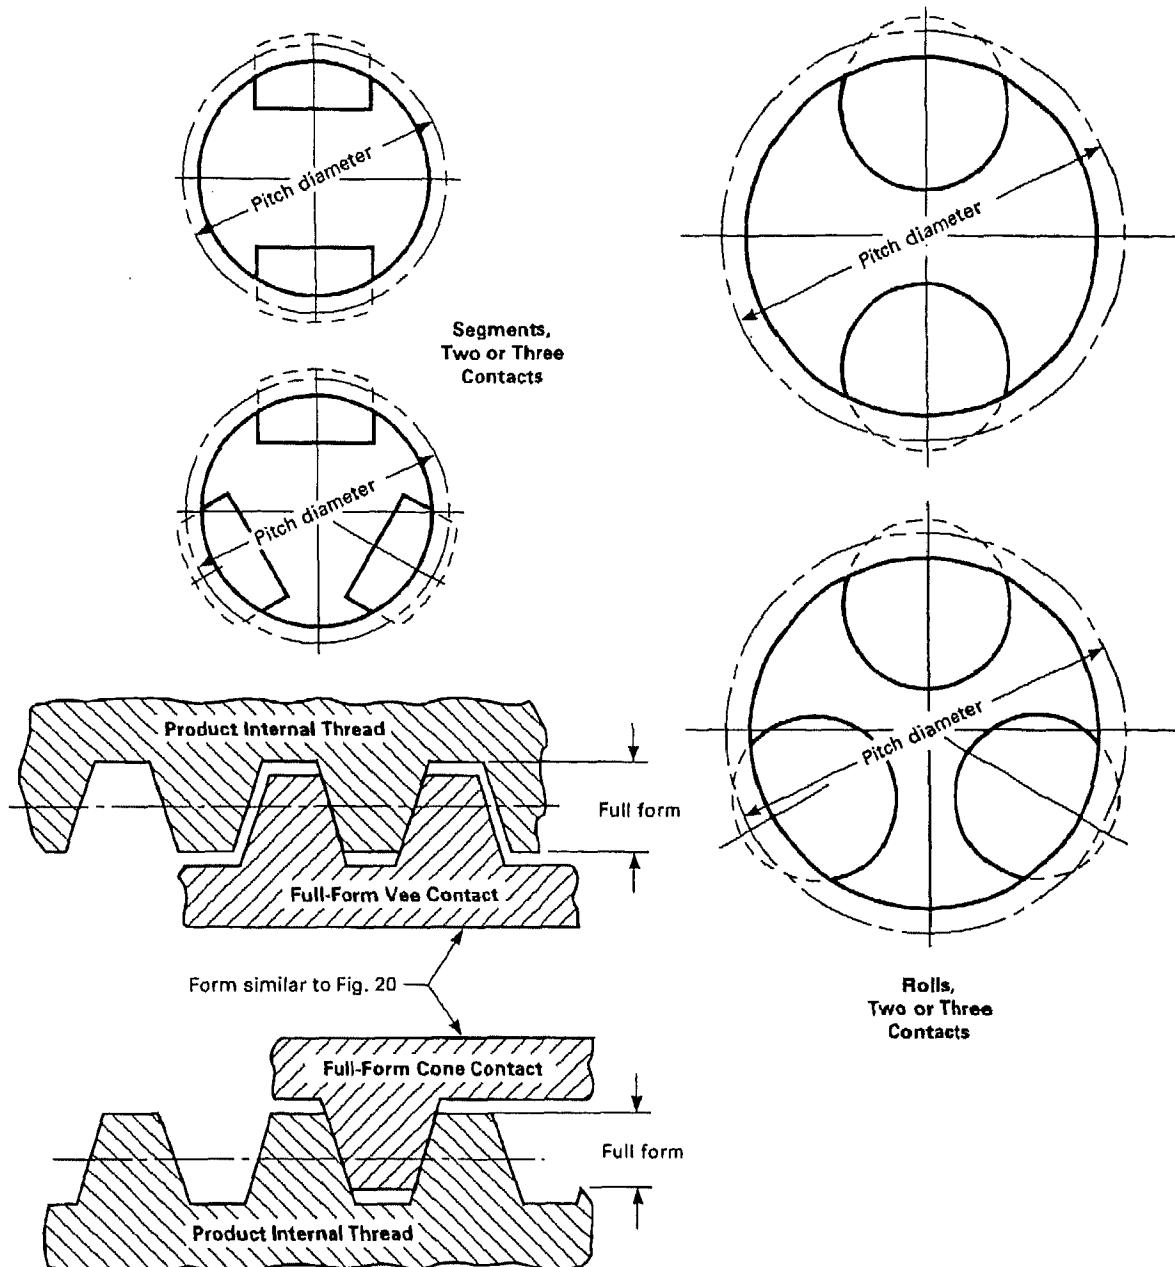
SINGLE-THREAD, FULL-FORM INDICATING GAGES —
